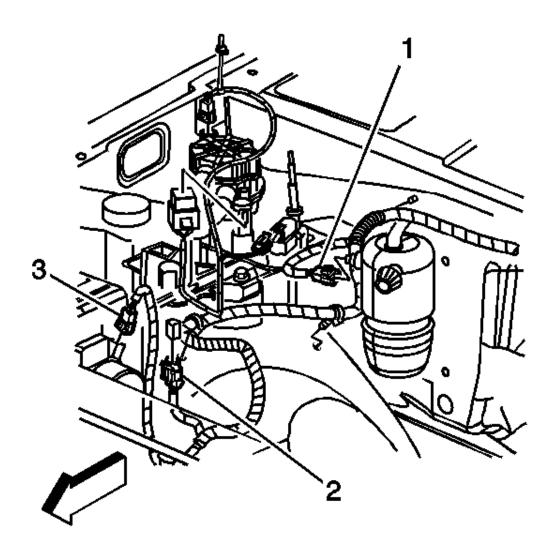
View Of MAF/IAT Sensor Electrical Connectors Courtesy of GENERAL MOTORS CORP.
